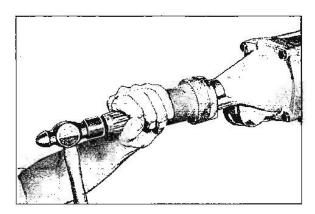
B-31 Installing Rear Bearing Retainer Oil Seal
